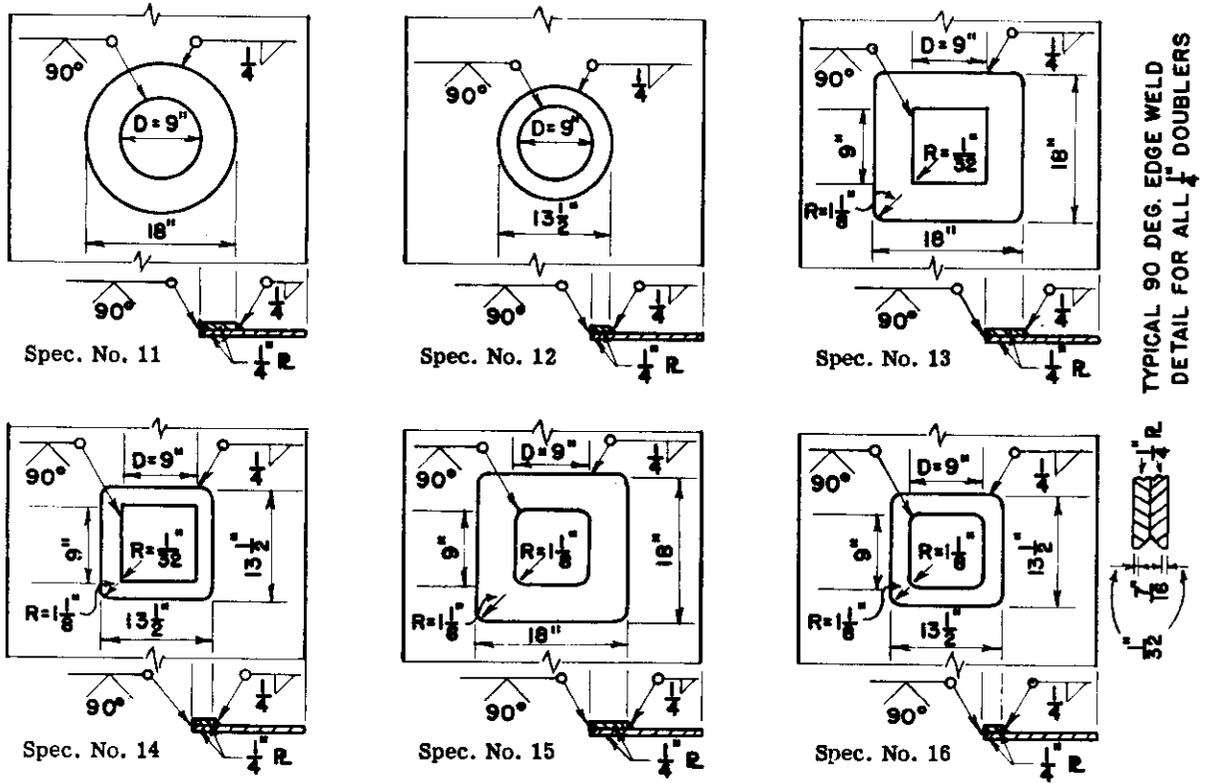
Details of Plates with Openings Reinforced by a Single Doubler Plate.
